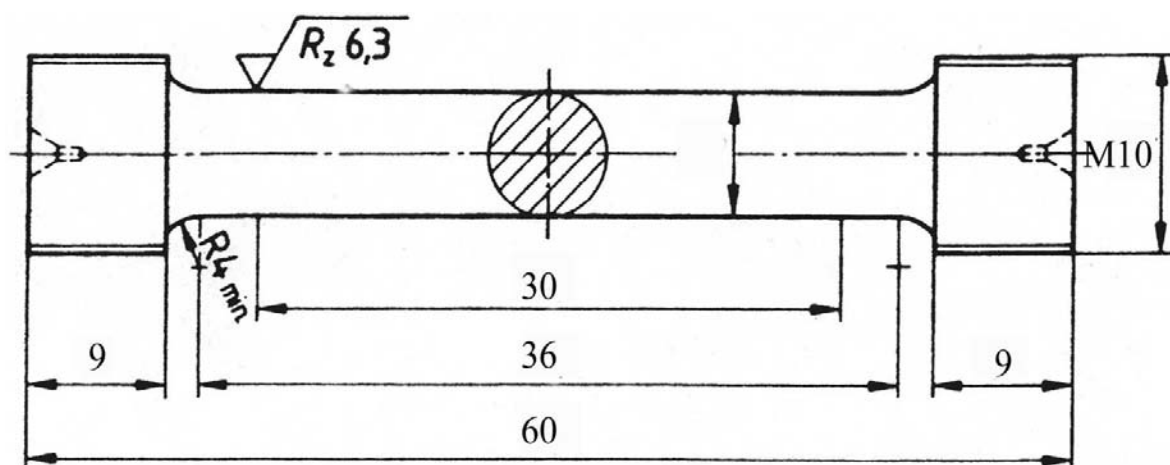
Geometry of the tensile specimens used to investigate the tensile properties for the friction welding process (dimensions in mm).
